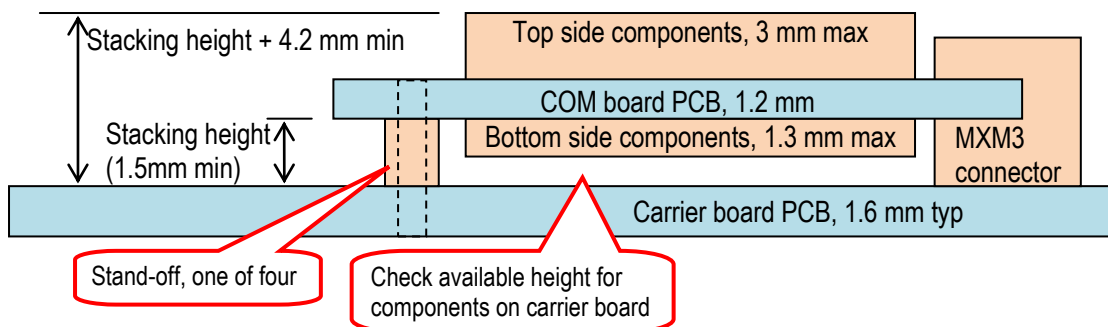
EACOM Board Mounting in MXM3 Connector, Stacking Height
